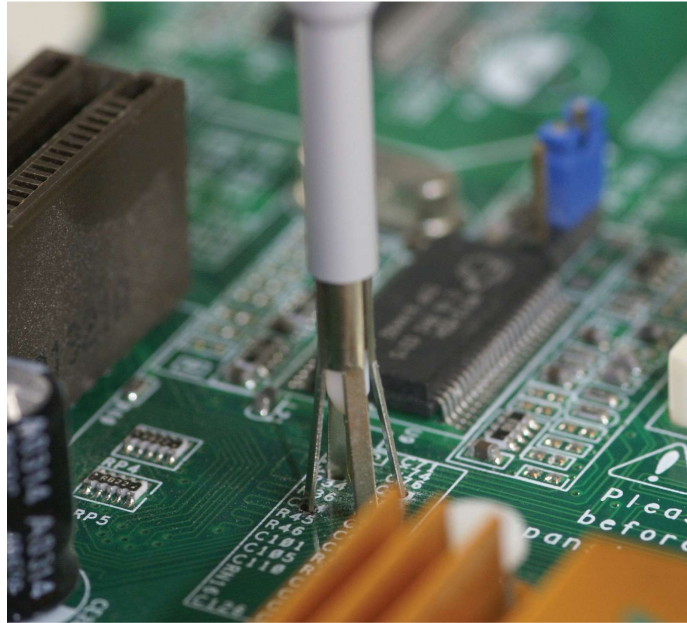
The Keysight N2885A PCB adapter sockets are designed to solder into a printed circuit board (PCB) as test points to minimize ground inductance and maximize signal fidelity. This package contains 25 sockets.
